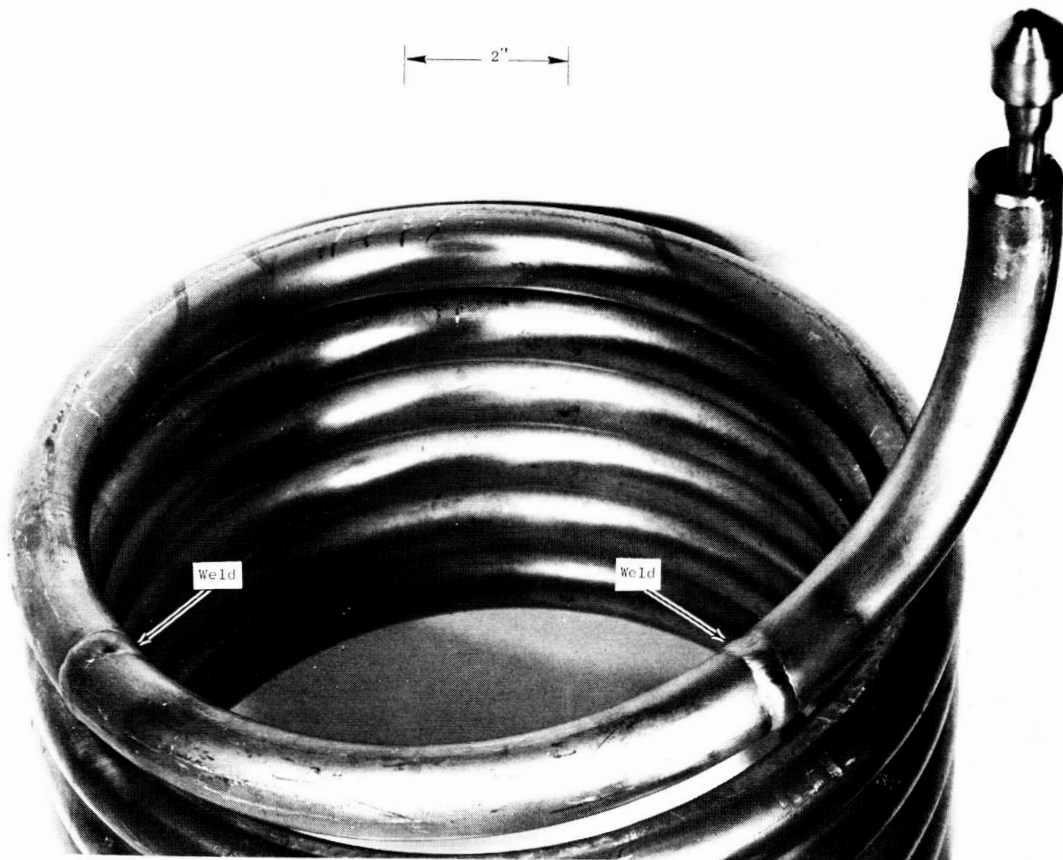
Top of T-111 boiler following initial repair welds.
